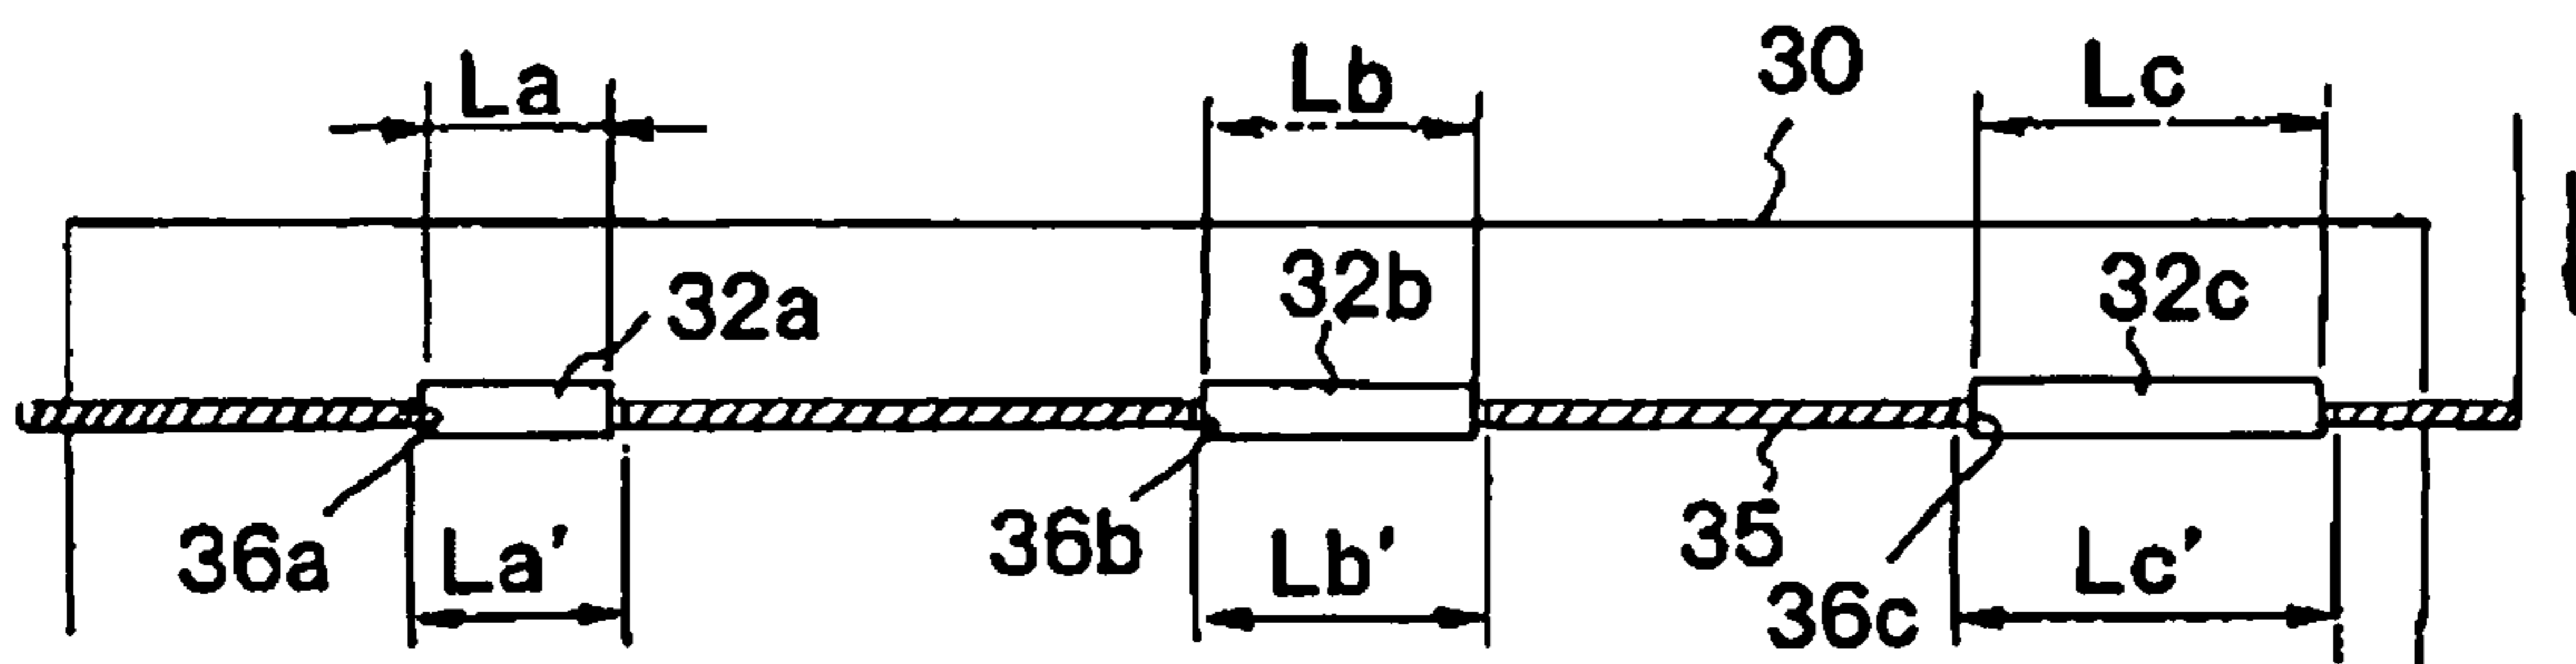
IMAGE FORMING APPARATUS INCLUDING DRUM UNIT ATTACHABLE AND DETACHABLE ALONG DRUM SHAFT
